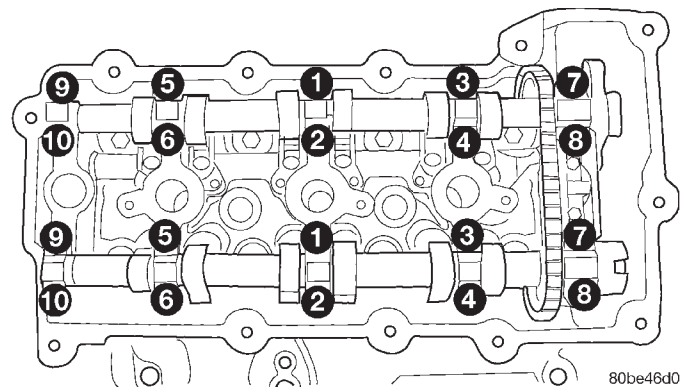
Camshaft Bearing Cap Tightening Sequence
